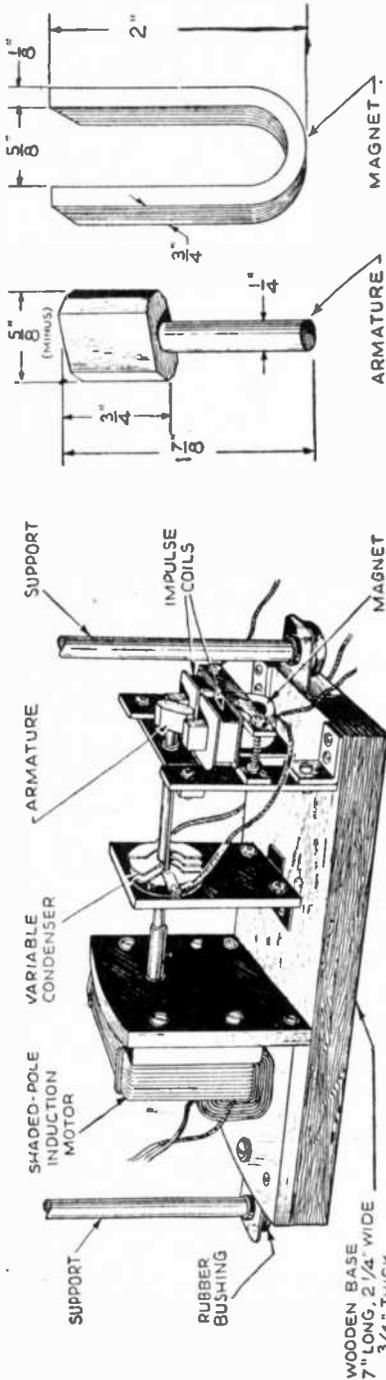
Complete constructional drawing for building the frequency modulator (wobbler) and impulse generator.
